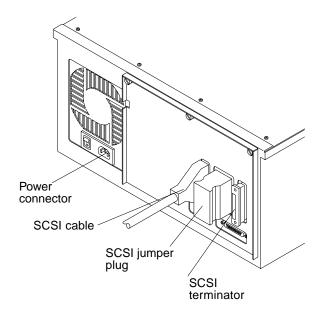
Location of the SCSI Terminator, SCSI Jumper Plug, and SCSI Cable
